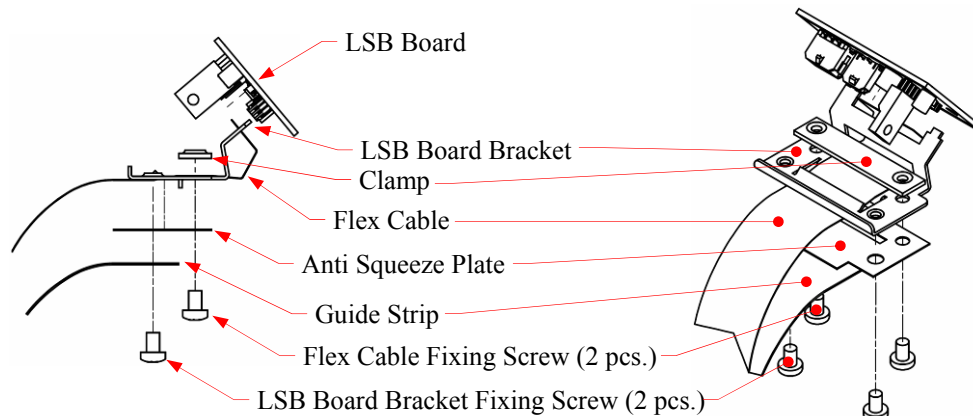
, LSB Board and Flex Cable (Light Carriage End)
